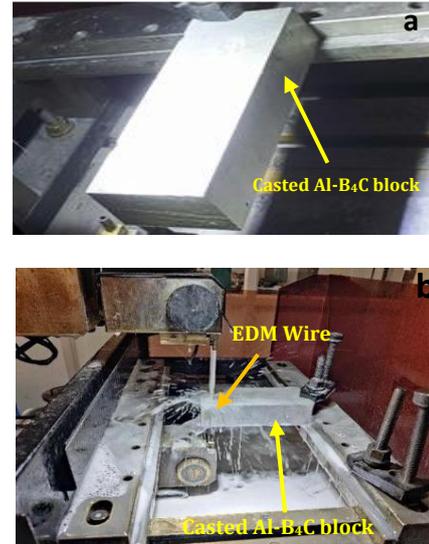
(a) Machined sample of Al-B4C composite (b) W-EDM machine
